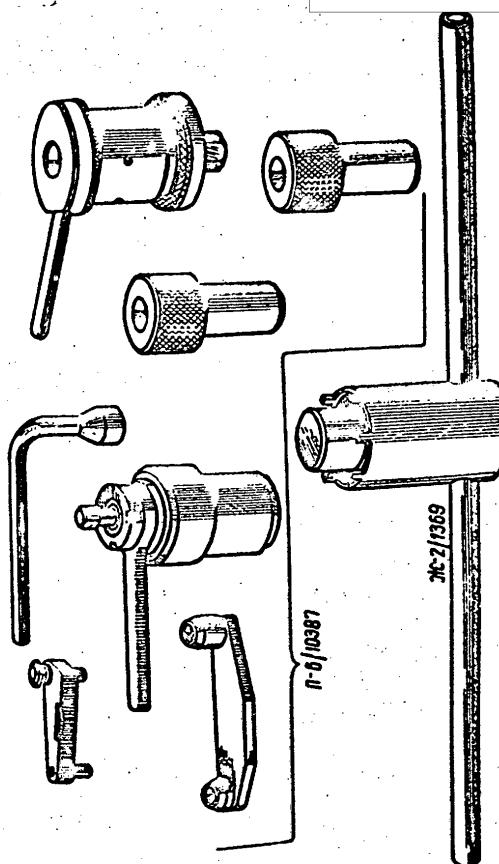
TOOLS AND FIXTURES FOR SUPERCHARGER ASSEMBLY
